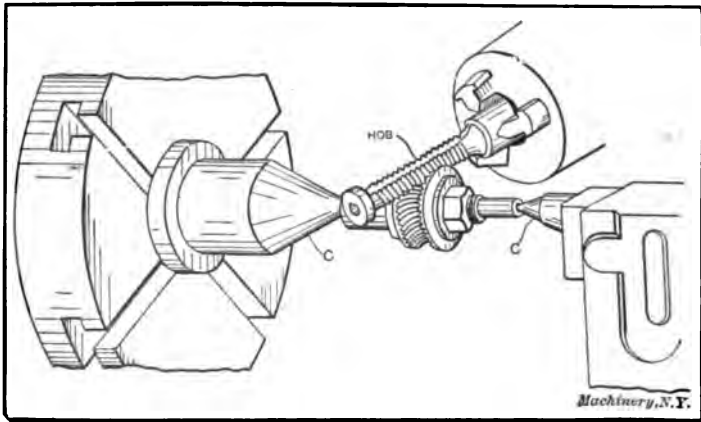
Cutting a Concave Knurl by a Hob in the Milling Machine
